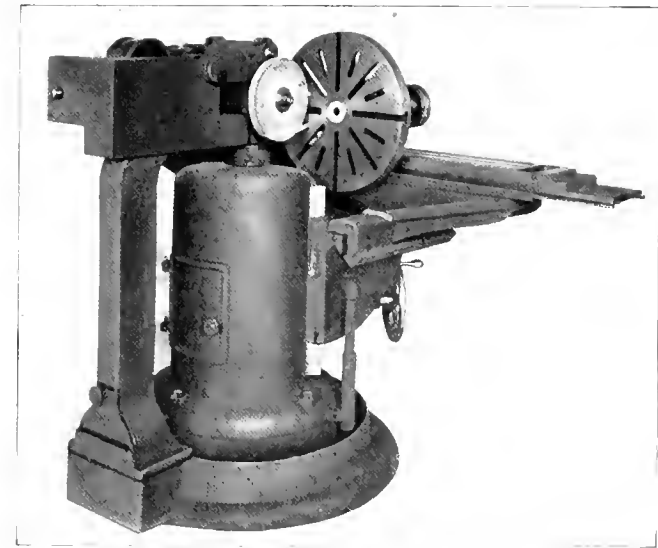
Machine with Faceplate for Die and Surface Grinding
